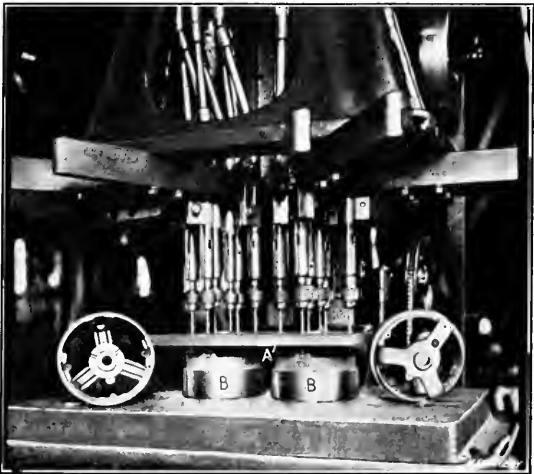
Drilling Two Alternating-current Motor Bodies in a Pratt & Whitney Multiple Drilling Machine at the Same Setting
